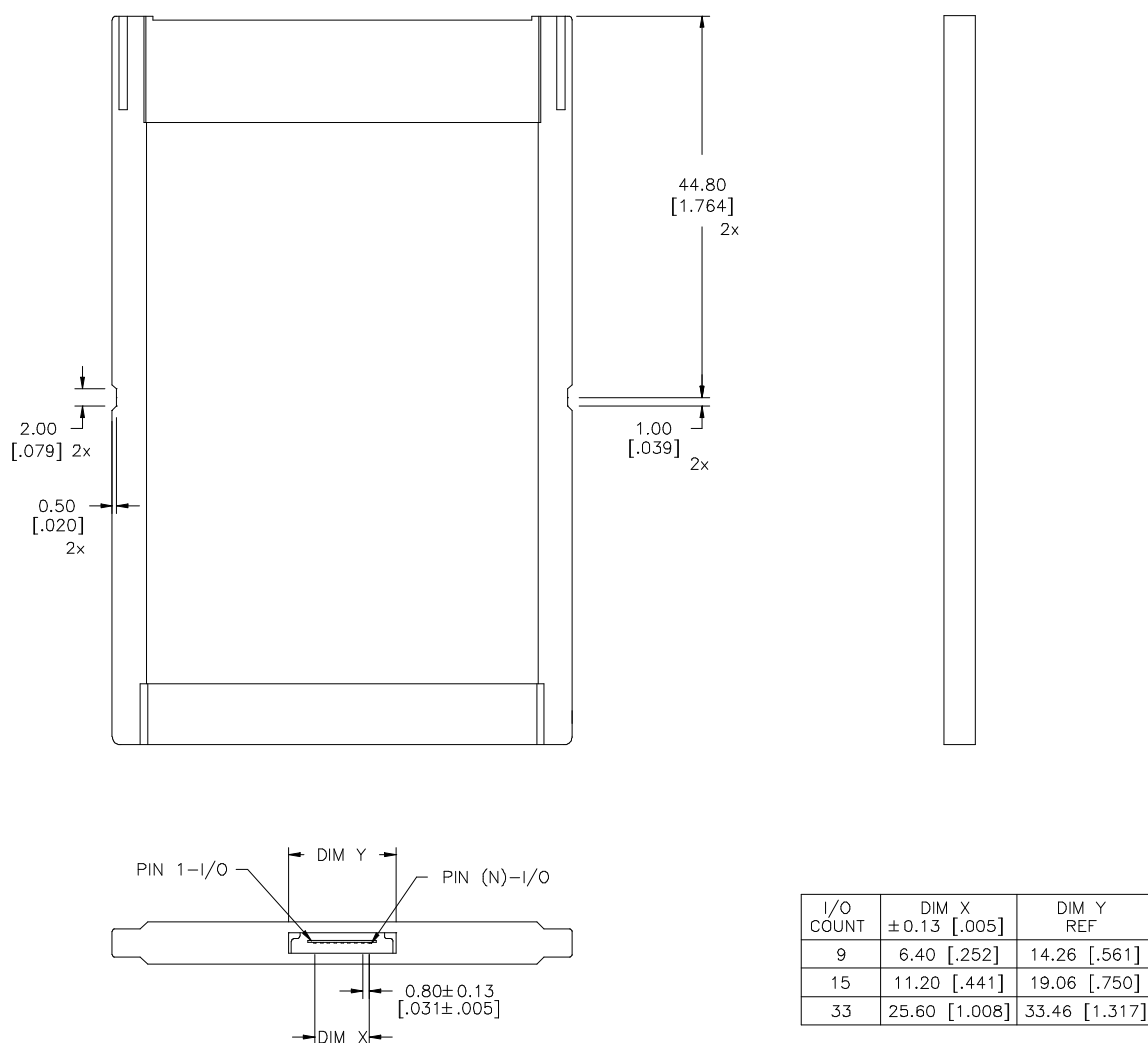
Small PCI Card Assembly With 0.8 mm Bus Connector, 2 mm I/O Connector, and Frame (Surface A Shown) With Optional Latching
